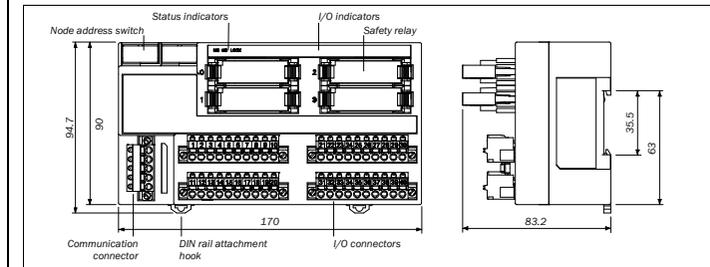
Dimensional drawing UE4421-22EE330 (mm)
